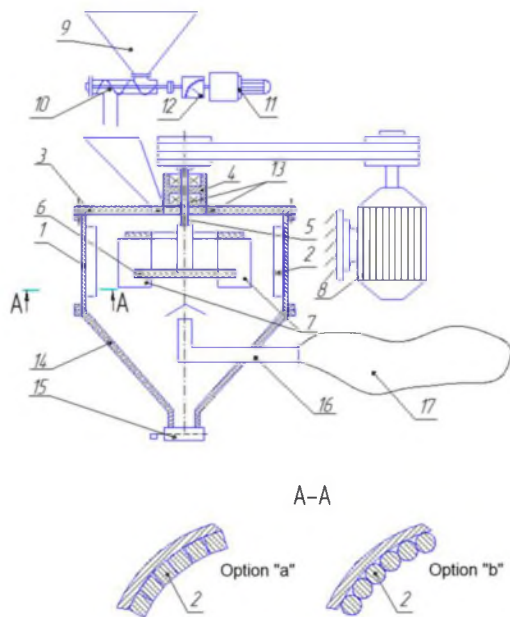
Scheme of the plant for the study of impact-centrifugal mill. 1 – mill body; 2 – reflective rods; 3 – cover; 4 – bearing unit; 5 – shaft; 6 – disk; 7 – blades; 8, 11 – electric motor; 9 – hopper; 10 – feeder; 12 – reductor-regulator; 13 – holes; 14 – collector; 15 – shutter; 16 – tube section; 17 – filter sleeve
